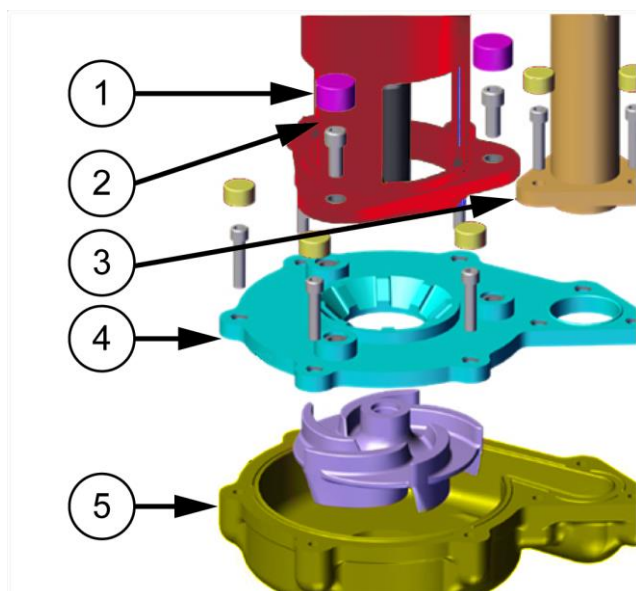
4V4VRE and Larger, Fitting Back Liner, Impeller, Casing, Discharge Pipe, and Column Clamp.
